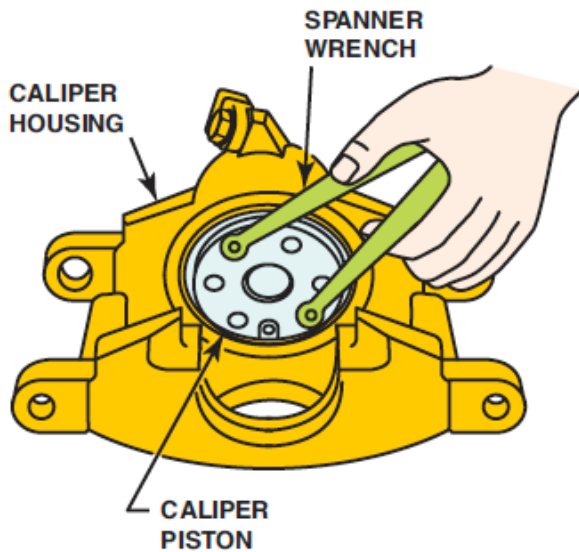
Rotate the piston to allow it to screw into the caliper bore.
